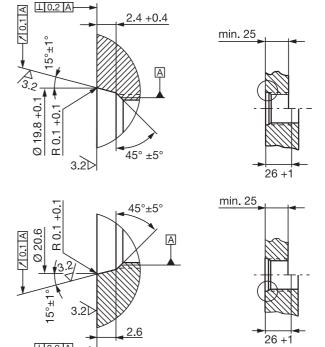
Threaded hole for mounting the BTL with O-ring
